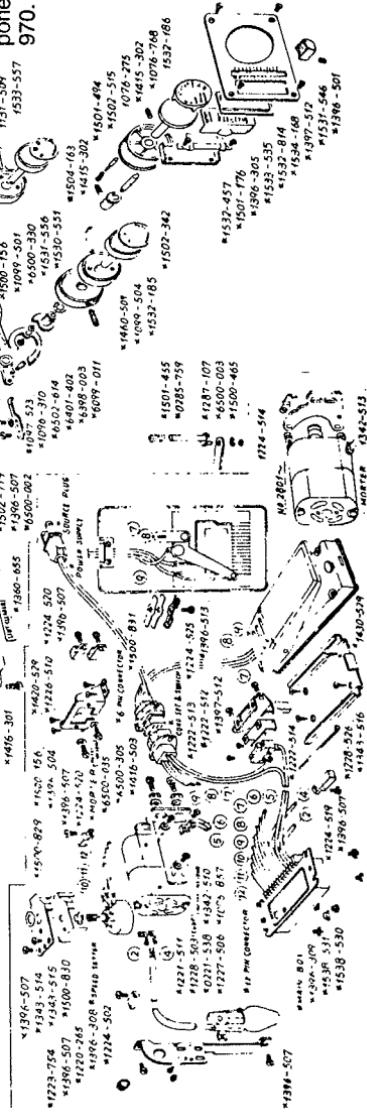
Exploded view of White Models 804 and 793, without the upper and lower mechanisms; B Exploded view of the electrical components of White Models 804 and 970.
